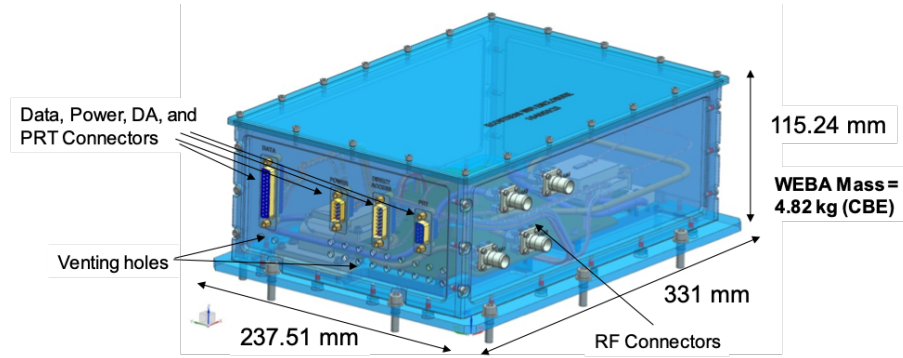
Computer-aided design (CAD) drawing of WEBA enclosure.
